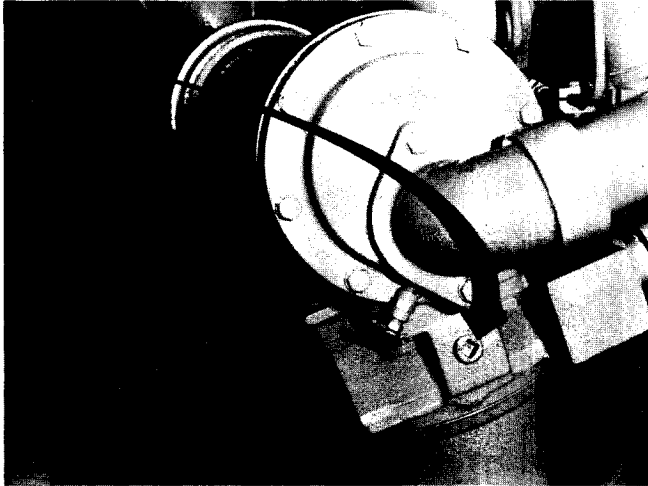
, (V41816). Lubricating system priming point — V-1710 Engine
